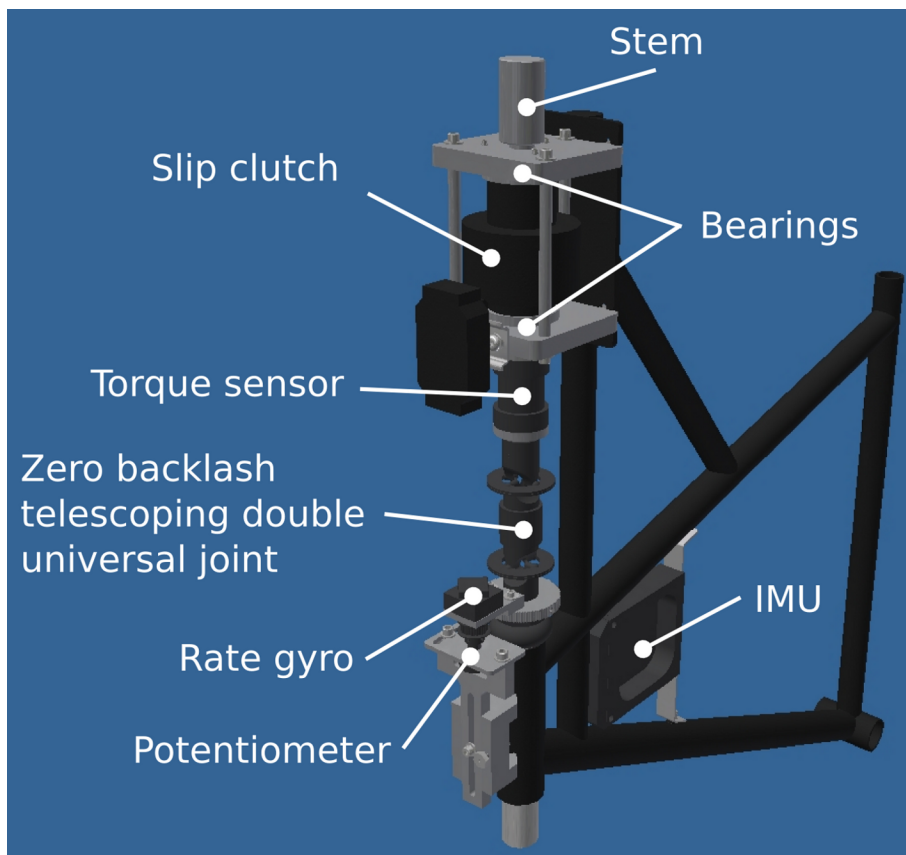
The final steer torque design. The steer torque sensor is mounted atop the universal joint such that the only load component which can be transferred through the sensor is an axial torque.
